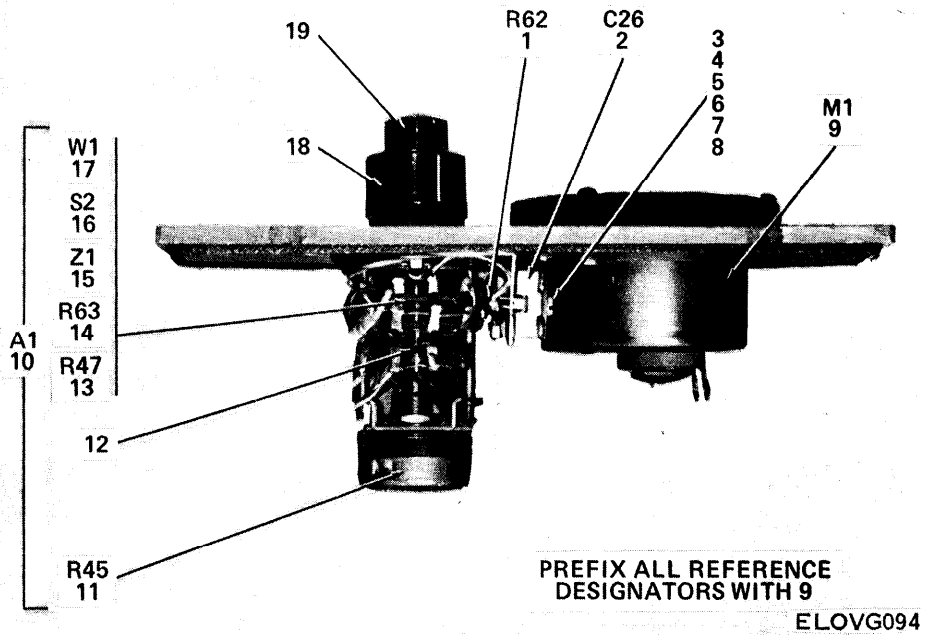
① Front panel assembly (sheet 1 of 2).
